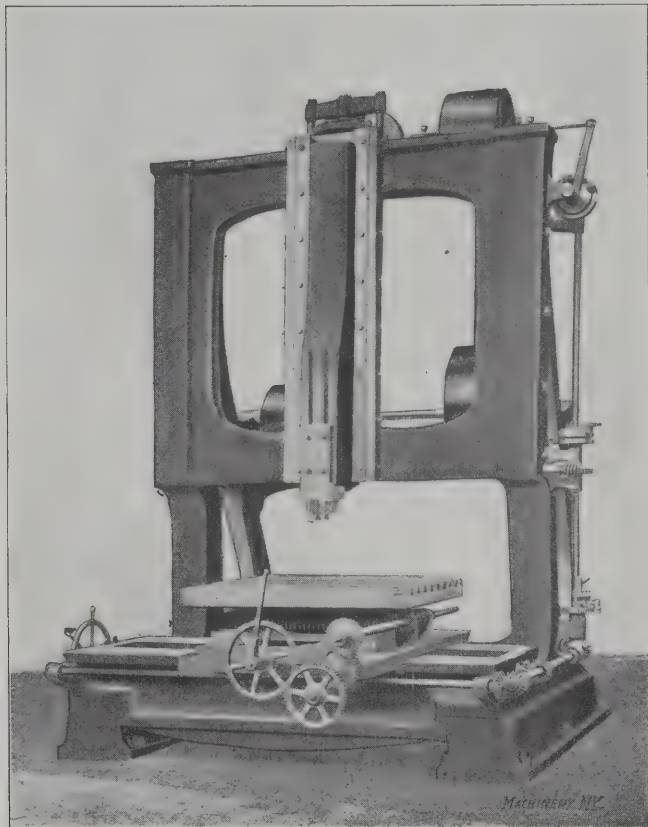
Slotting Machine. Joseph Whitworth & Co. (1874)
